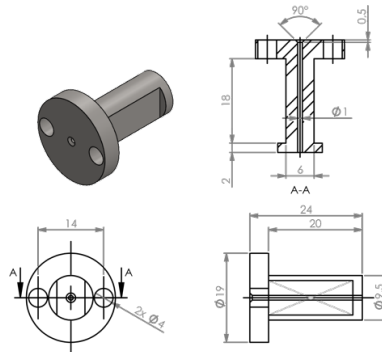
Technical drawing of 1 mm manufactured spinning nozzle.
